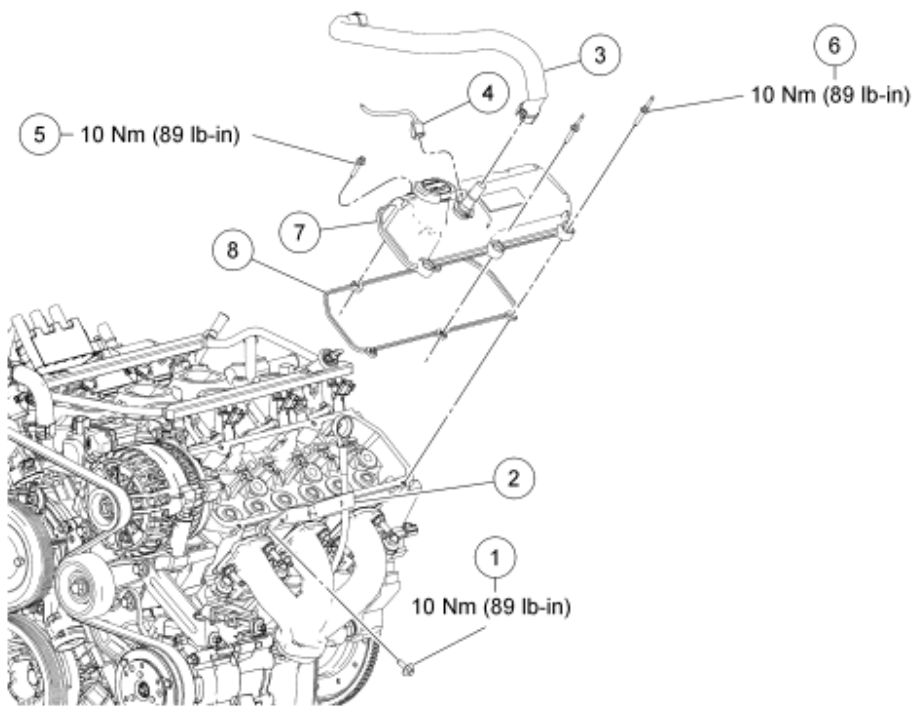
Exploded View Of Left Valve Cover (With Torque Specifications)
